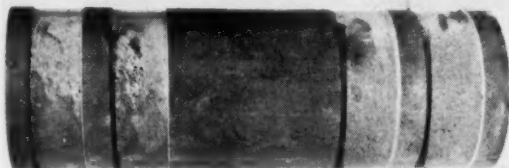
Eighteen-inch steel sleeve used for connecting clam jetting hose aboard the Delaware.
